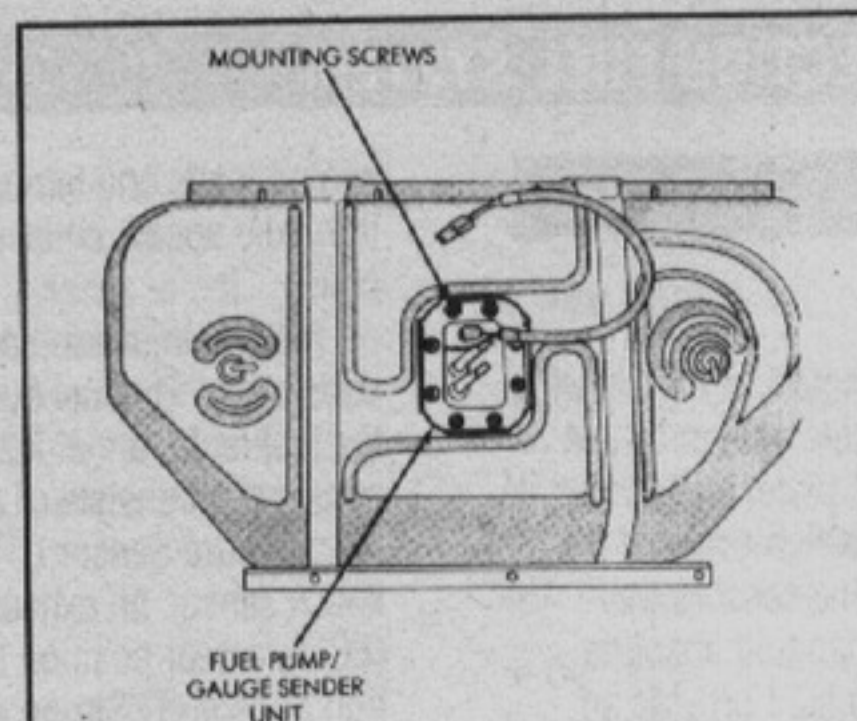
Fuel pump/gauge sender unit installation—with 20 gallon tank
